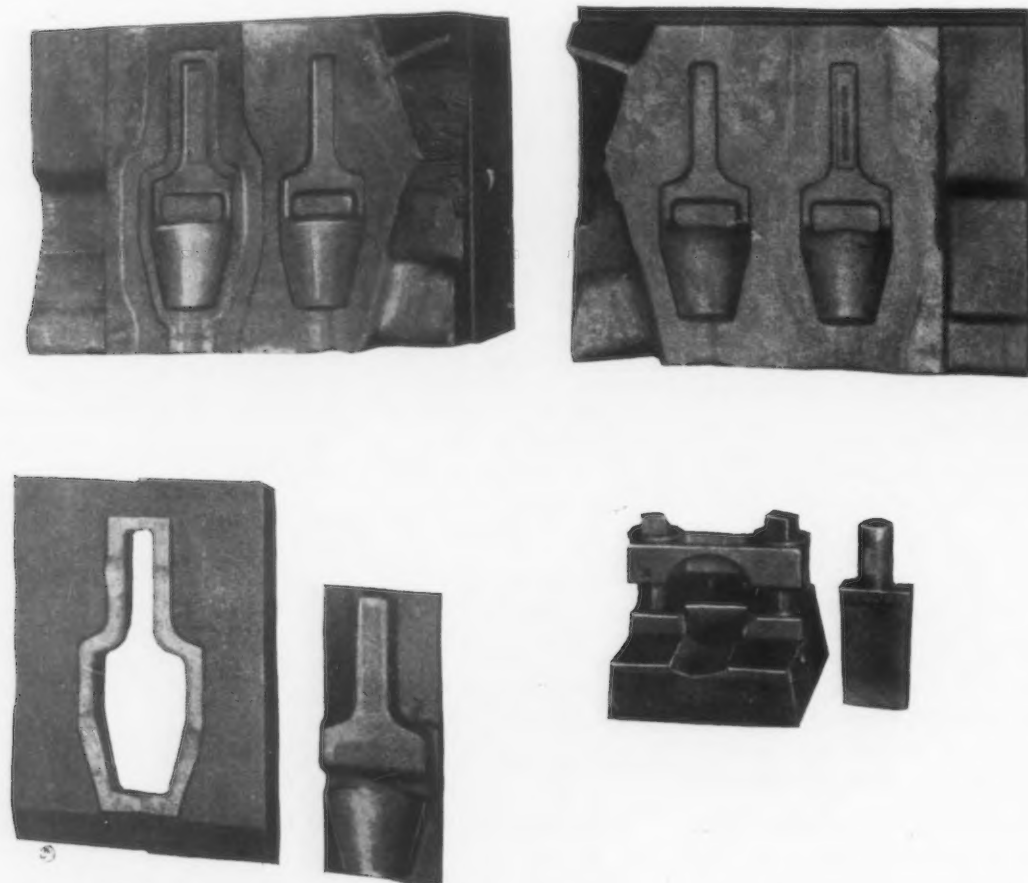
A Pair of Forging Dies (Top) with the Outside Trimmers (Lower Left) and the Inside Punch (Lower Right)
